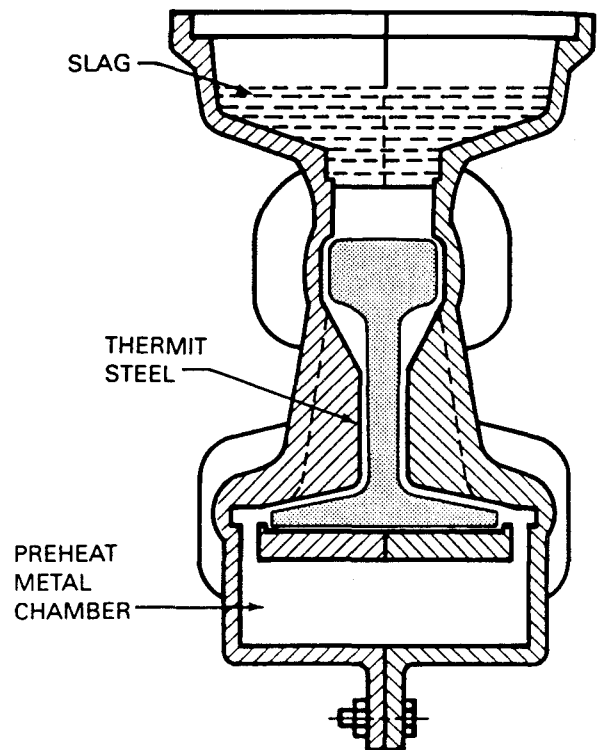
Section Through a Mold-Crucible Having a Preheat Metal Chamber
